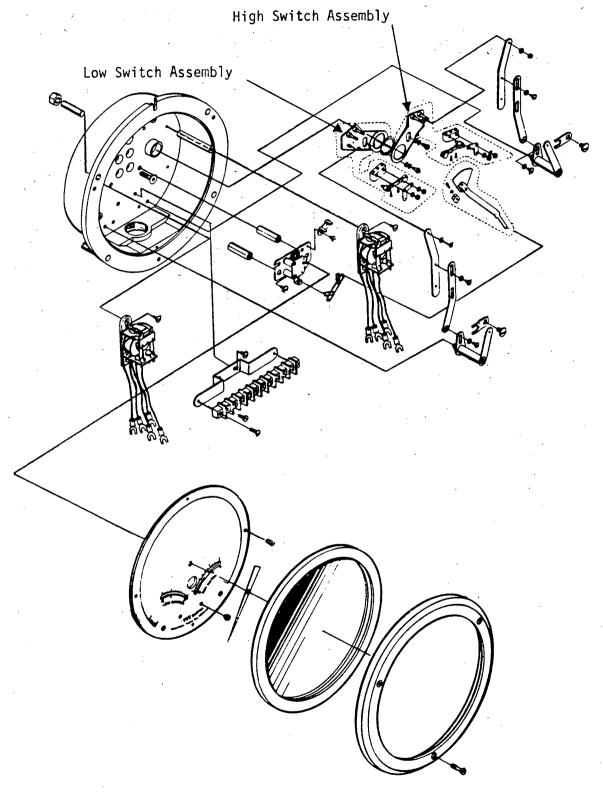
Barton 288A Indicating Switch - Exploded View
